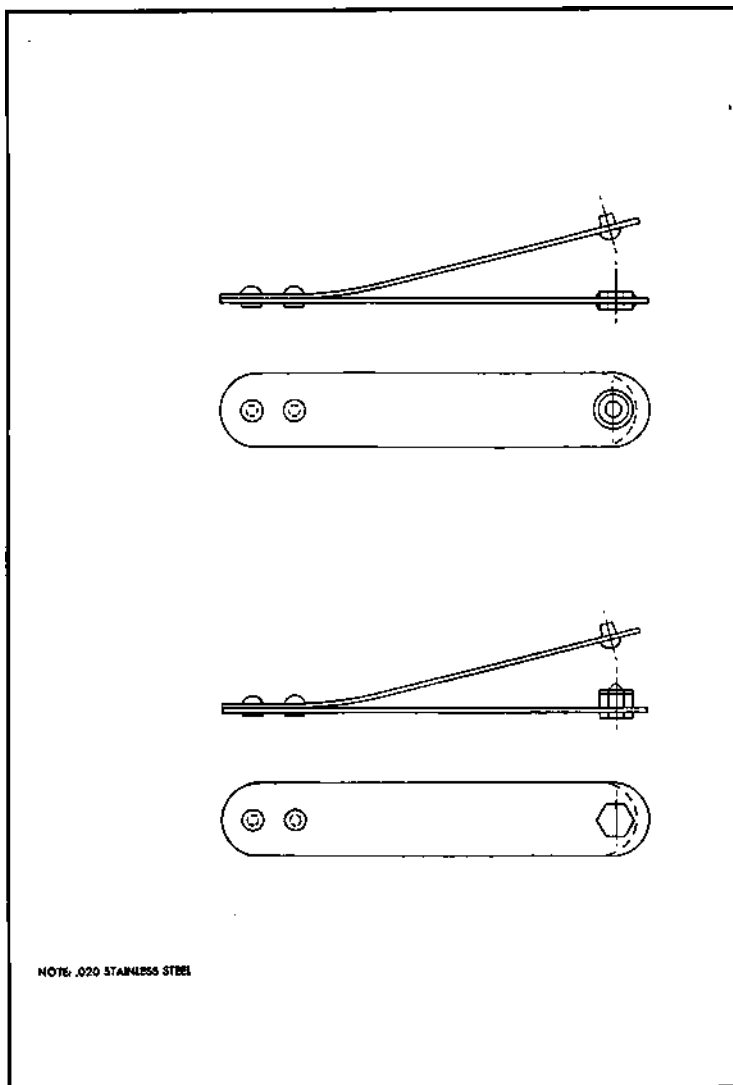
(SHEET 4 OF 4 SHEETS)—SPECIAL TOOLS—RIVET HOLE LOCATOR
